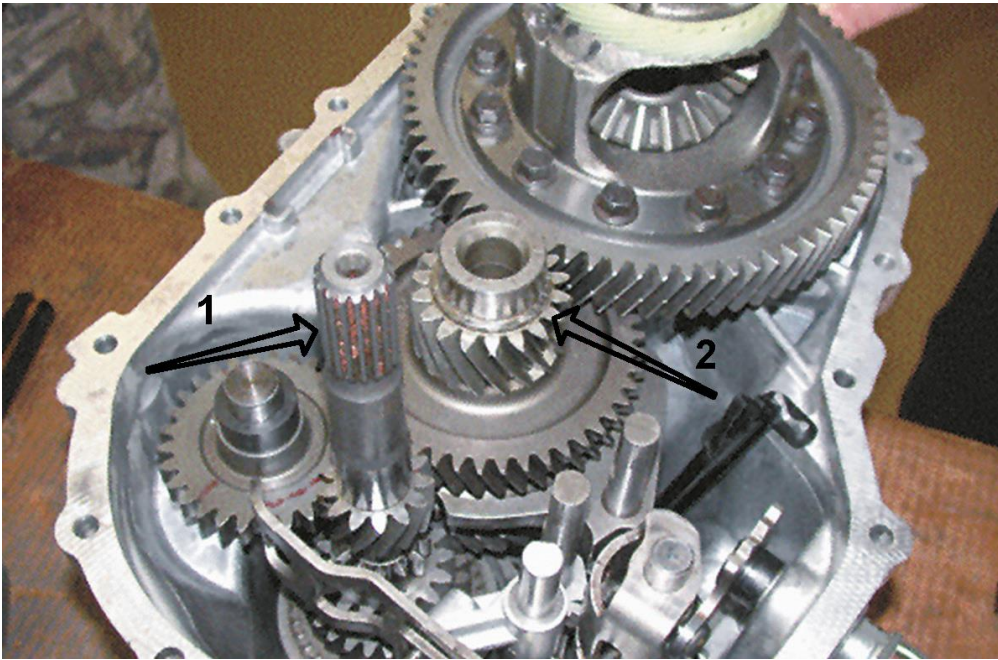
Input (1) and output (2) shafts and gear assemblies.
